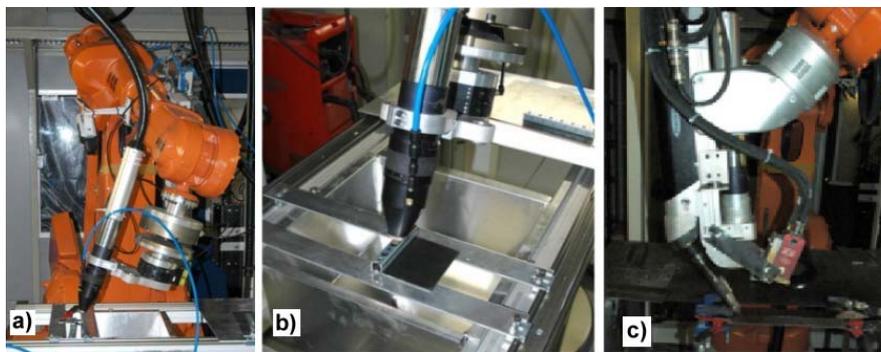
ABB robot operating at CLUPM a Nd:YAG laser beam head for: *a),b)* Laser Welding; *c)* Laser Hybrid Welding; *b)* details in case of laser spot welding of aluminum automotive parts.
